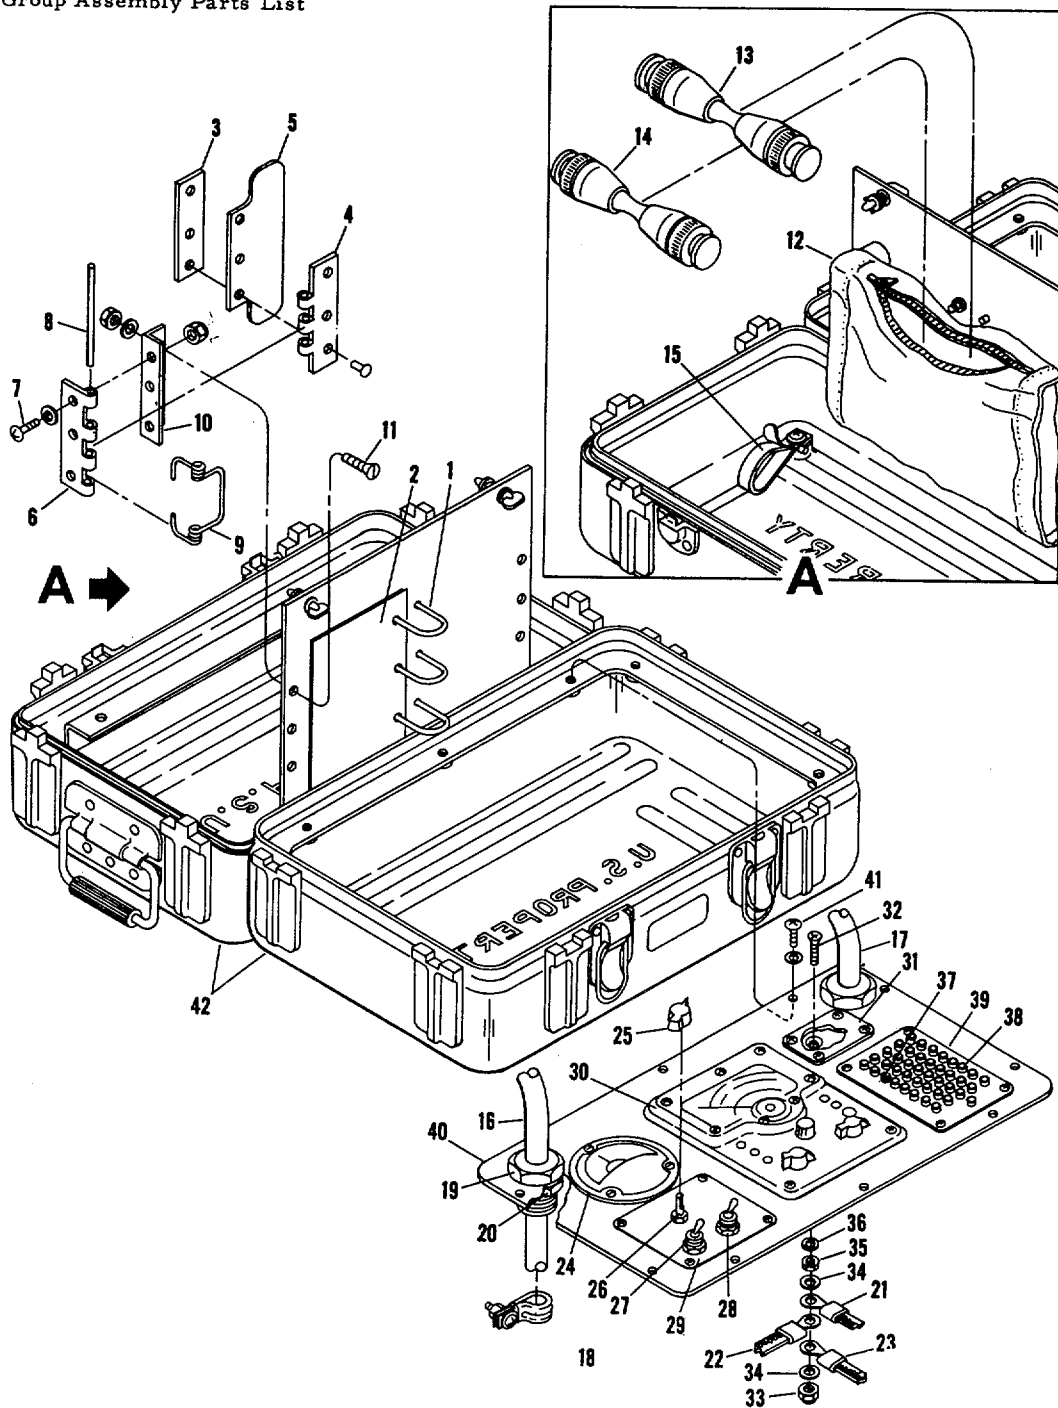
SAS, ASE, AND S/T LINE TEST SET, EXPLODED VIEW 47
